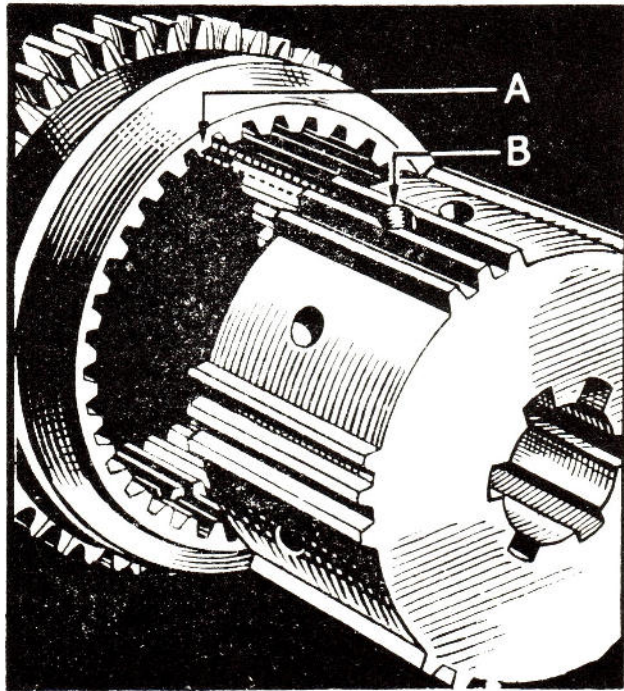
Engagement of gear wheel and second-speed synchronising sleeve.
